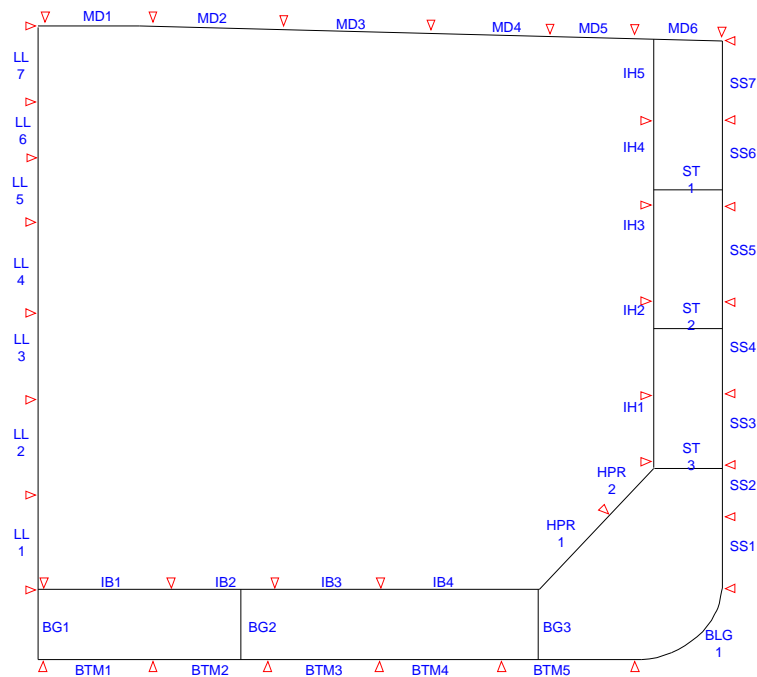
Oil Tanker cross section example showing strake labelling and locations
